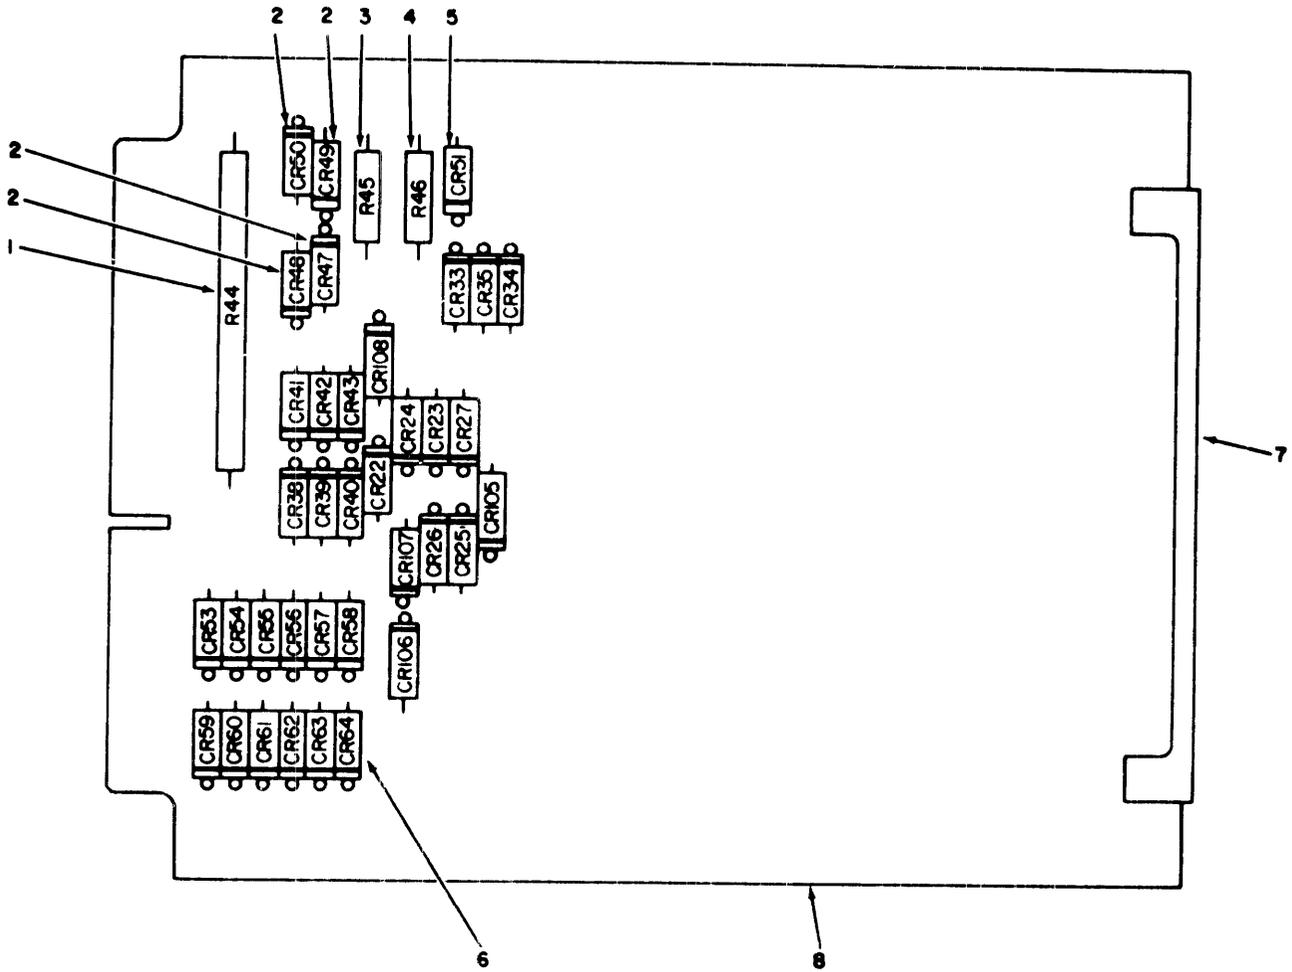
Circuit Cord Assembly A4 Component Location Diagram.
